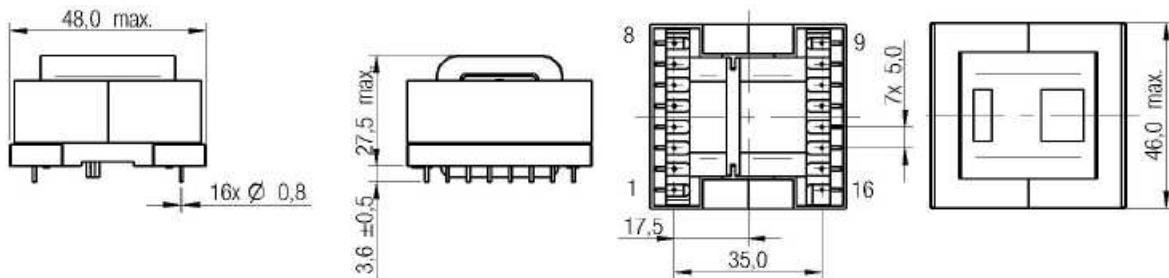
Würth 760895731 Mechanical Drawing (dimensions in mm)
